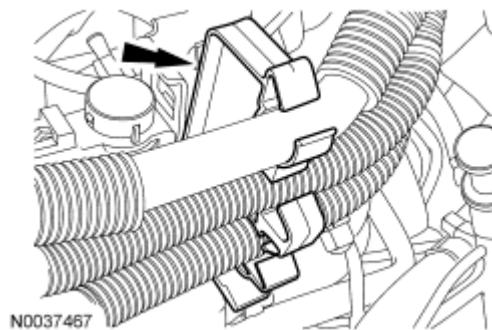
Locating Evaporative Emissions (EVAP) Tube Bundle Retaining Clip
